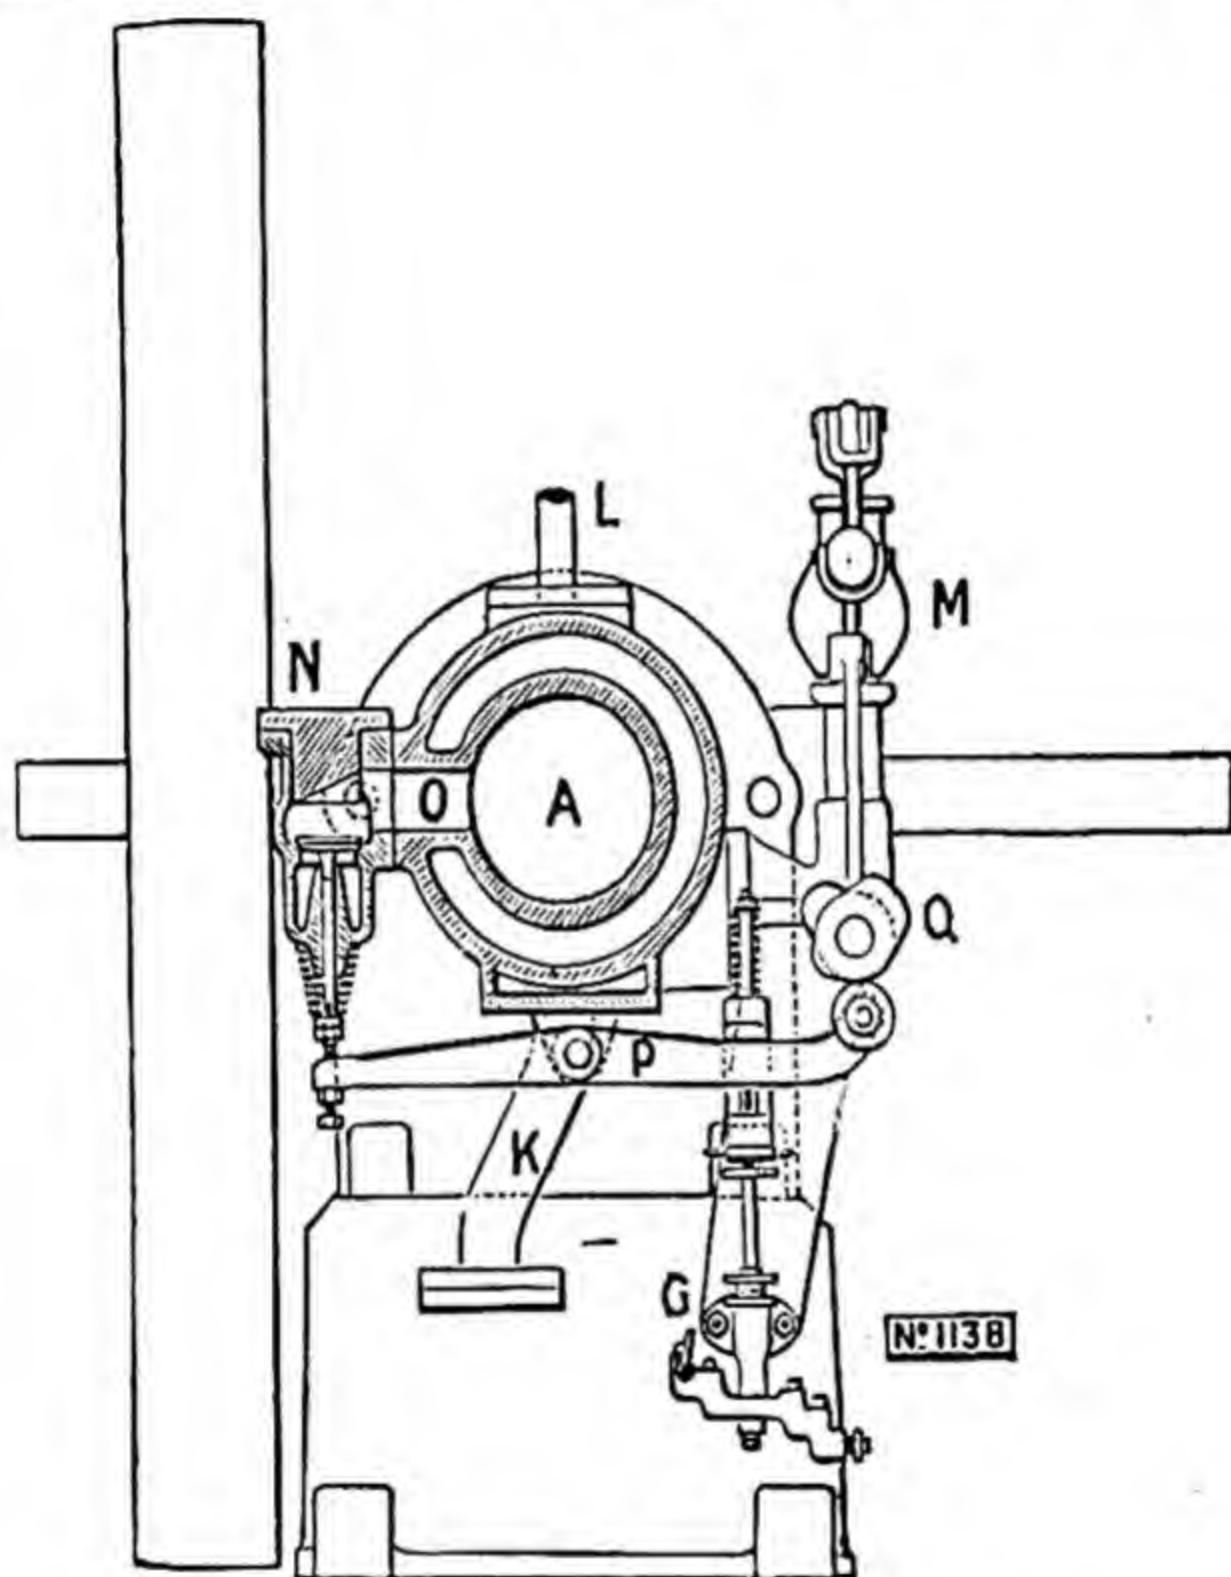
Sectional end elevation of the Hornsby-Akroyd oil engine.
